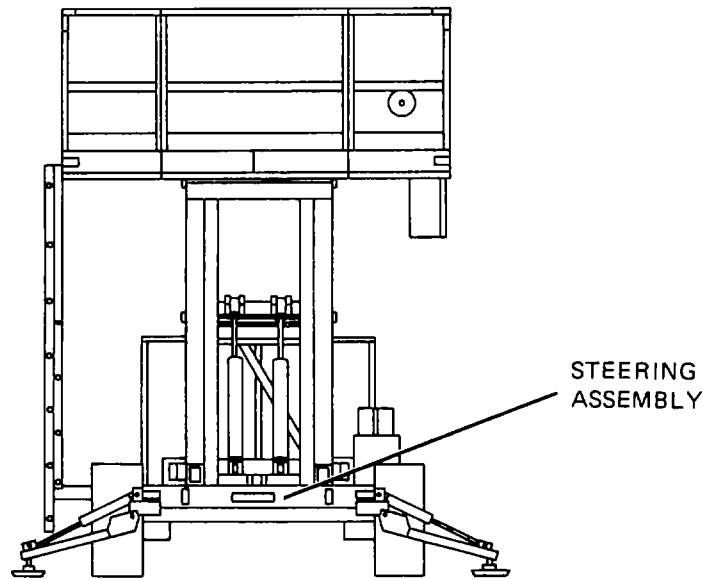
Steering Assembly (Sheet 1 of 3).
